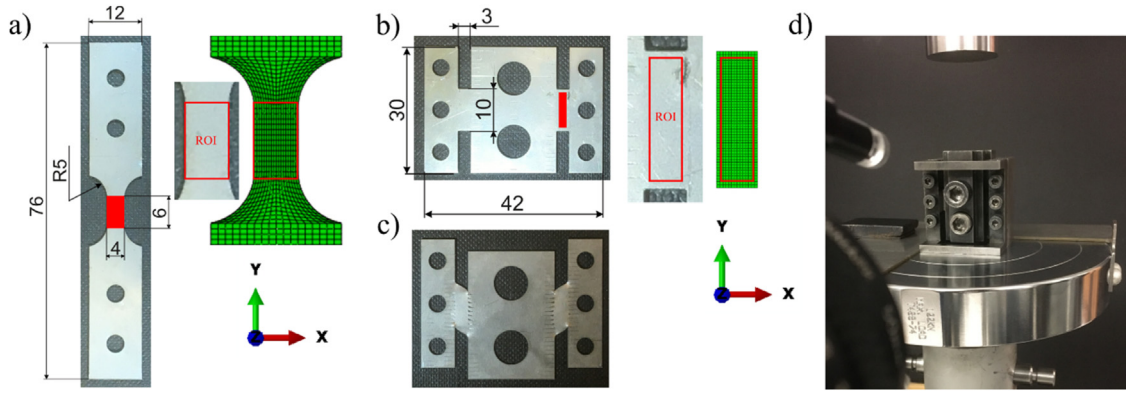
Geometry and dimensions of samples for (a) uniaxial tension and (b) simple shear. (c) The deformed specimen after shear test. (d) The device for fixing specimens for simple shear test.
